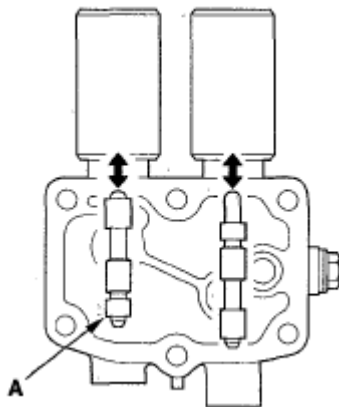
Identifying A/T Clutch Pressure Control Solenoid Valve A
